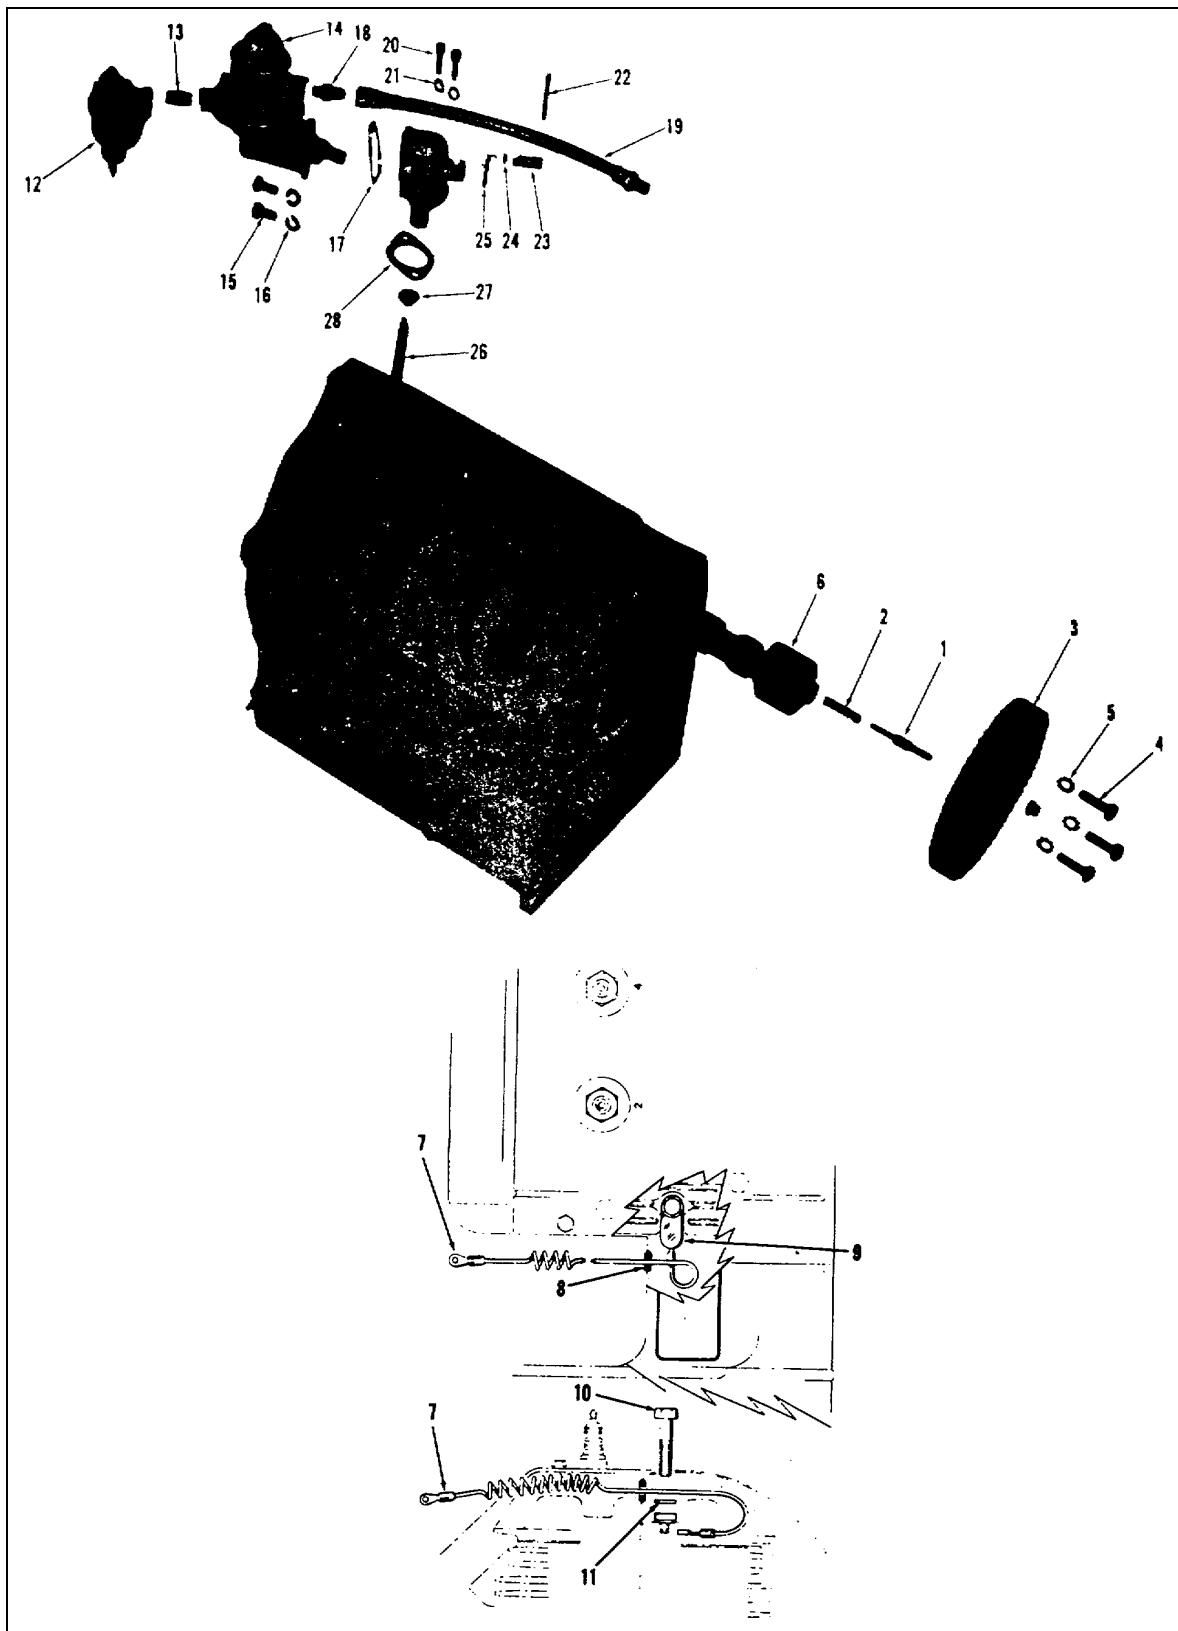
Camshaft, Safety Switch, and Fuel Pump Mounting Group
